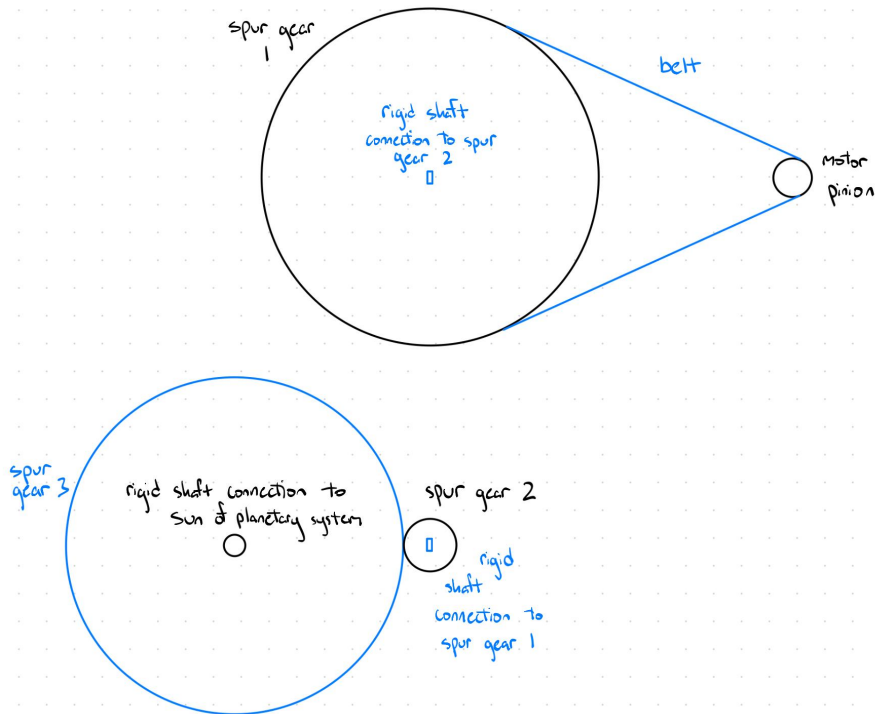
Top-down view of spur gear train with labels showing meshing and connections between gears.
